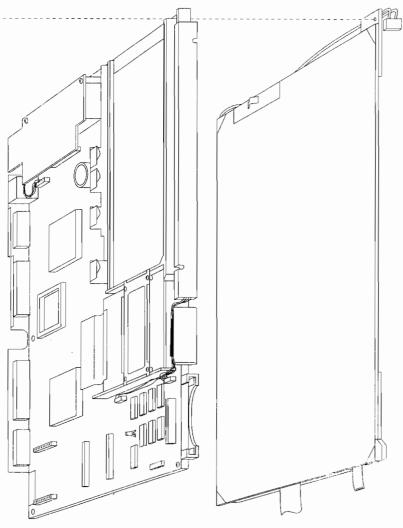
Removing and Replacing the Screen/Digitizer Subassembly
